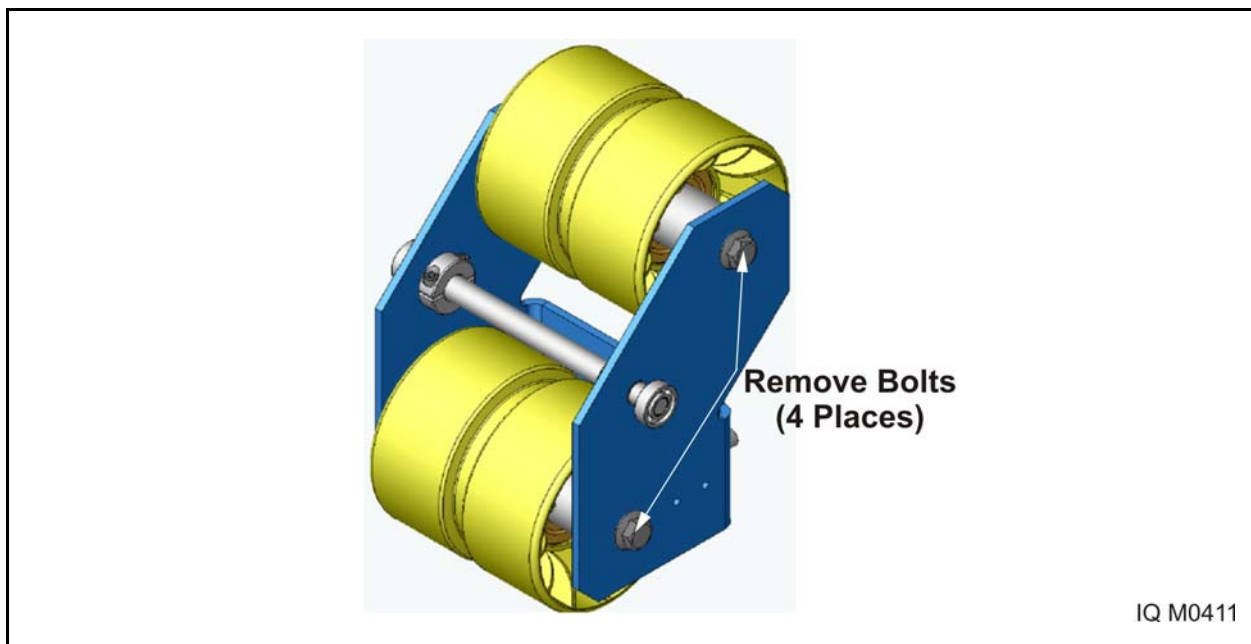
60 Removing the Dual Idler Take Up Assembly
